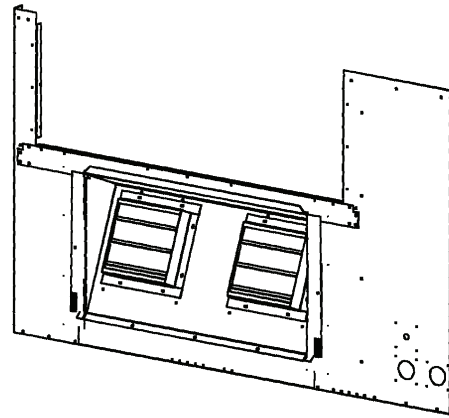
Power Exhaust/Relief Damper Assembly (Shown Folded)
